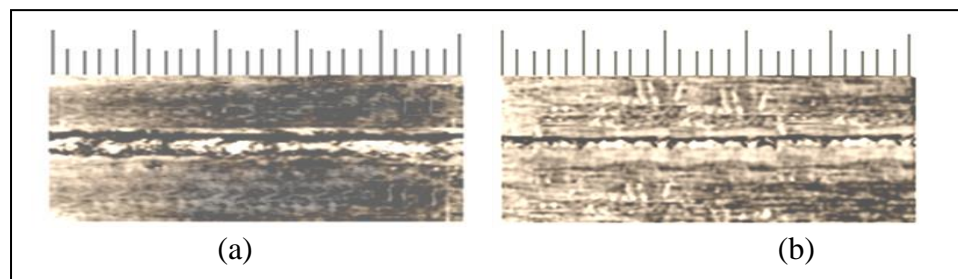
(a) Weld face and (b) Root of Cu-Ni 90/10 laser welds
